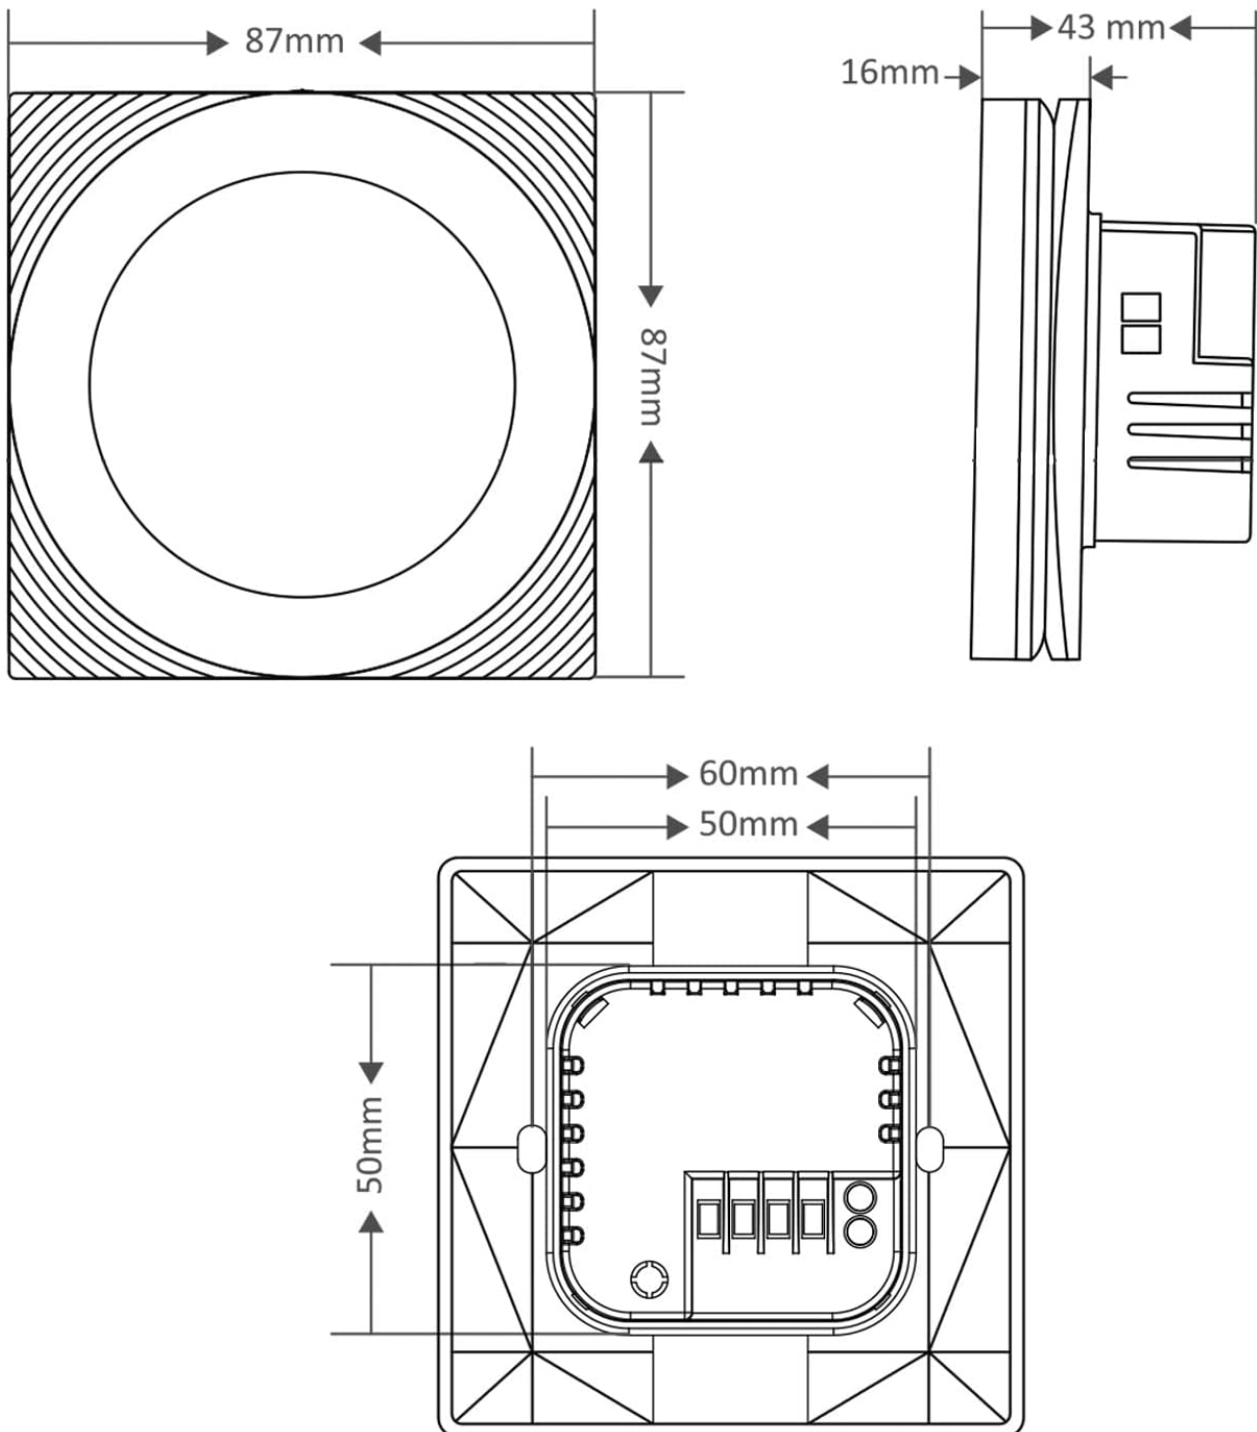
Technical diagram showing the dimensions of the Ymiko Smart Thermostat, including front, side, and rear views with measurements in millimeters.
